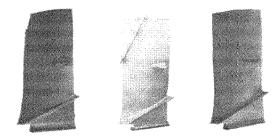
Repair of FODed F404 fan blade by electron beam welding a corner patch to replace damaged portion of blade.
